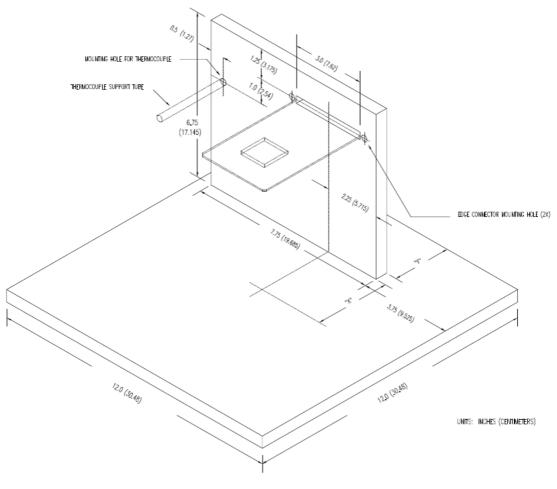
, TEST FIXTURE (HORIZONTAL & VERTICAL)
